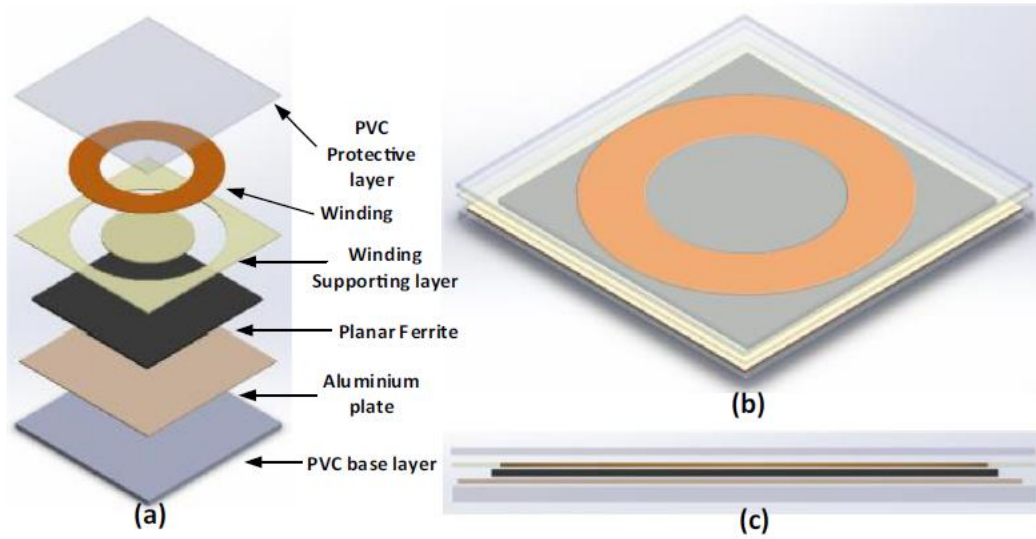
Wireless Transformer (a) exploded view (b) Top view (c) Cross-section (Courtesy of Z.Liu et al.).
